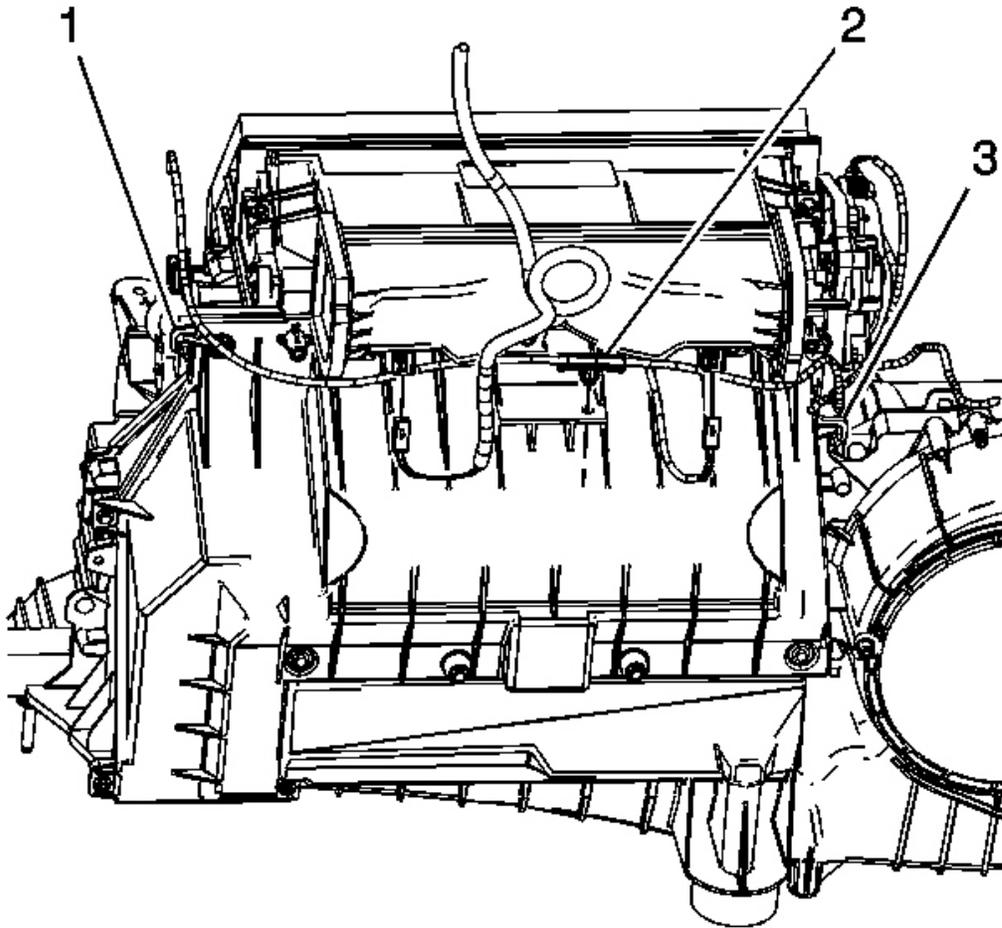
Identifying Heater Core Cover Wire Harness Retainer & HVAC Module Wiring Harness Retainer Pin
